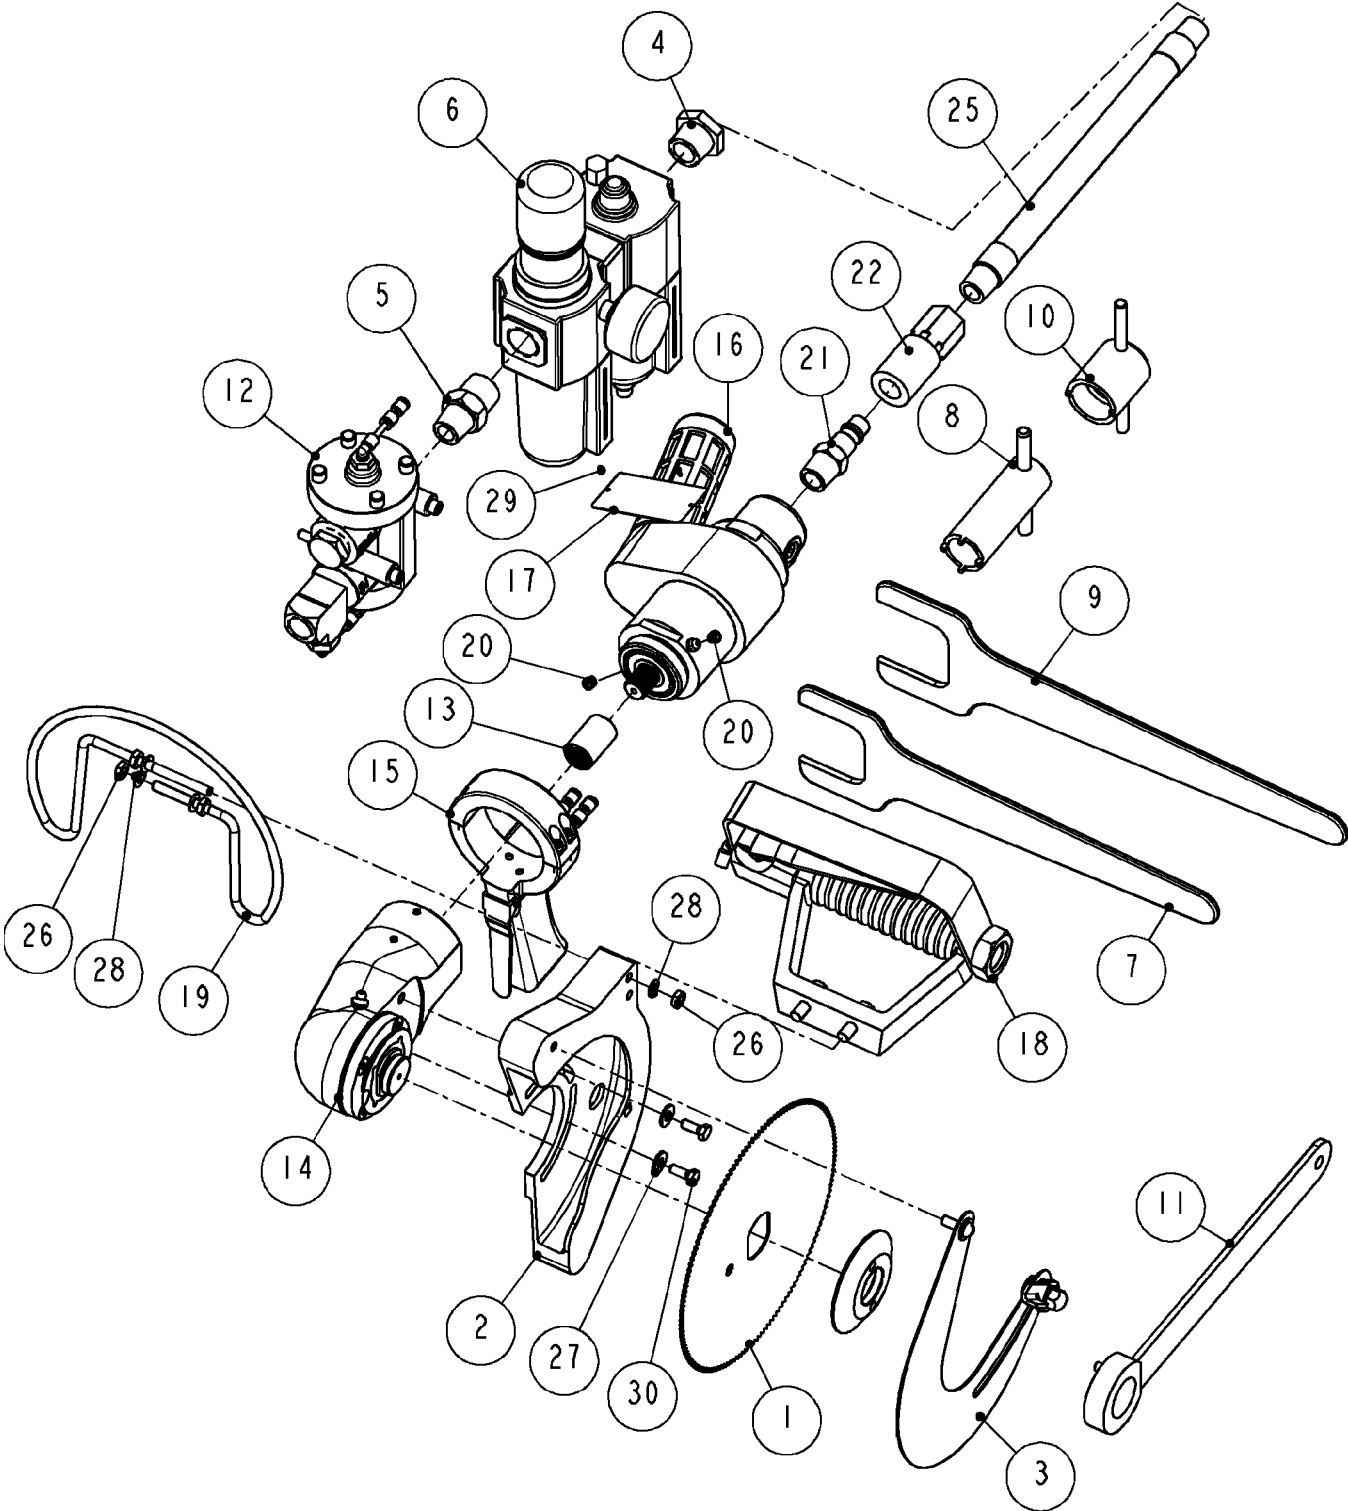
MODEL "SL-1100" – MAIN ASSEMBLY
